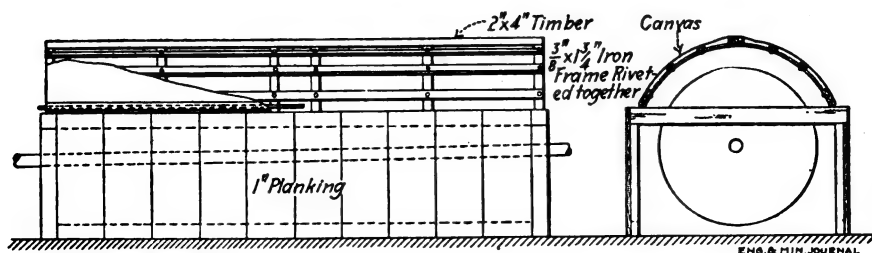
HOOD USED ON DOE RUN TROMMEL.
